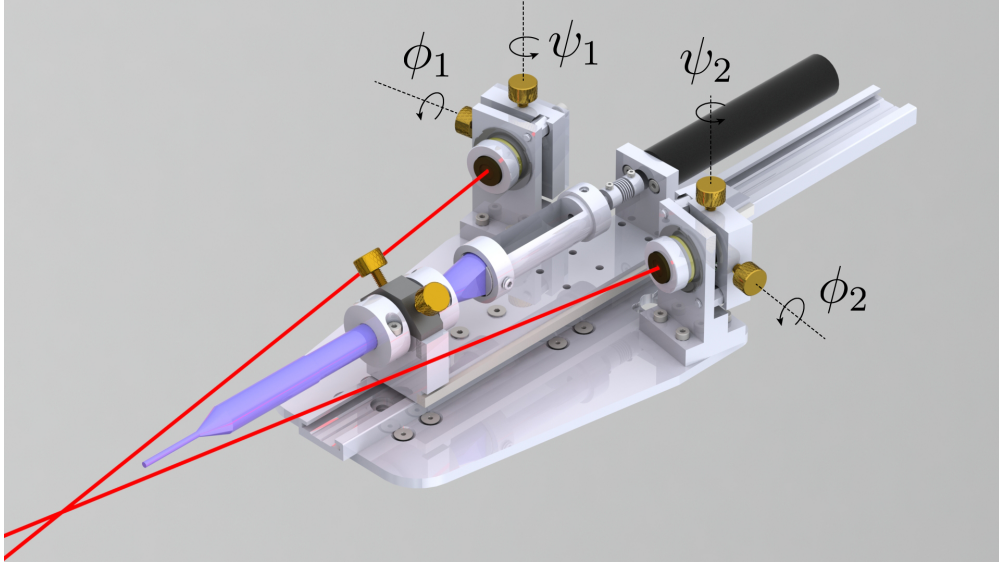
The CAD model of the RCM laser tool holder (isometric view).
